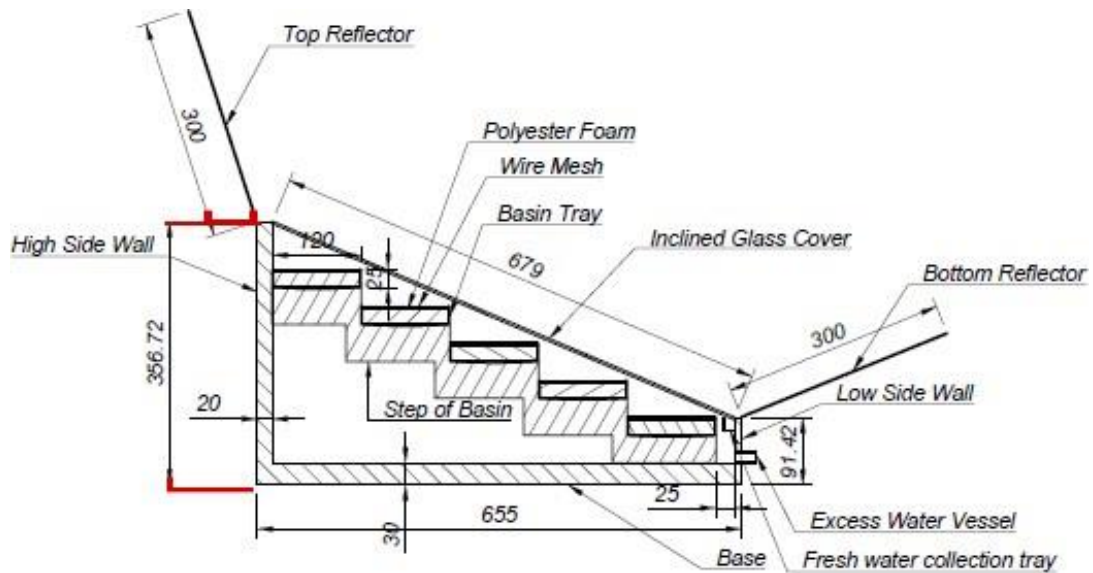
Side View of Stepped Solar Still (Unit is Millimeter).
